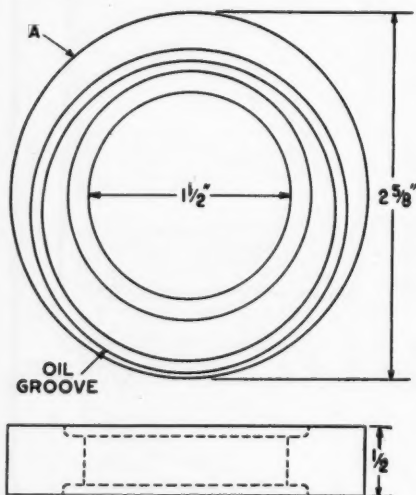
Drawing of Brass Ring for Which Grinding Fixture Shown in Fig. 2 was Made
